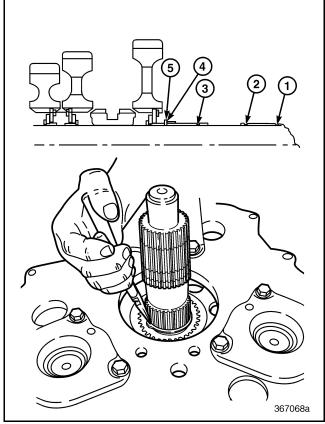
Installing Spacer Snap Ring onto Mainshaft (T313L/T318L Shown)
